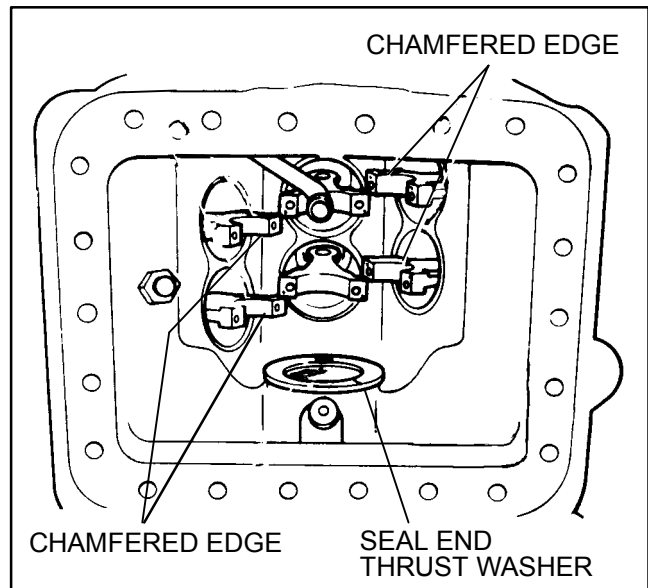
Installing Piston Rod Assemblies and Seal End Thrust Washer
